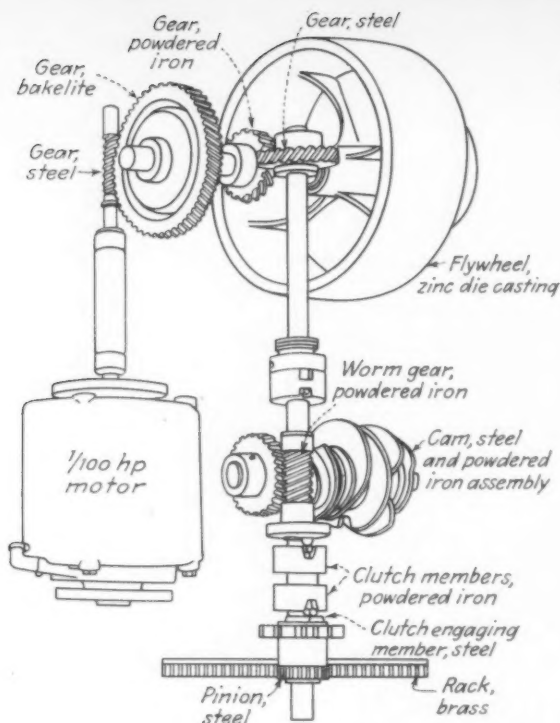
The entire unit is driven by a special 1/100 hp motor through a double gearing and clutching arrangement. The gears leading into the turntable or flywheel rotate the record and those leading into the base drive the carriage along the track.
